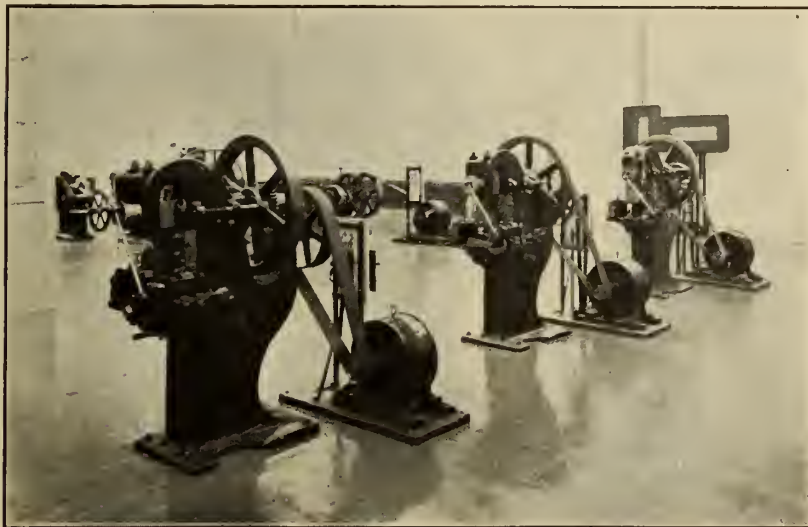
Machines in Cutting, Adjusting and Marking Department.
